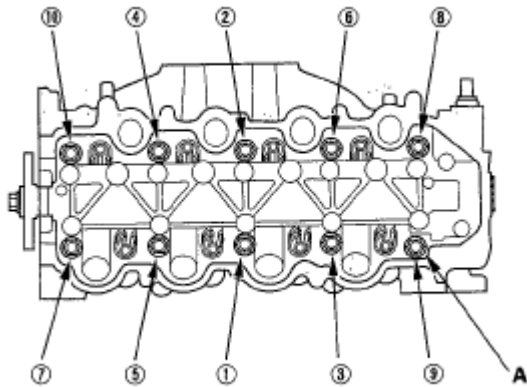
Identifying Cylinder Head Bolt Tightening Sequence
